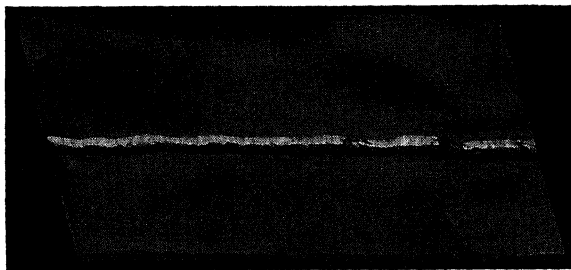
Welded joint in copper produced by the manual carbon arc process.
